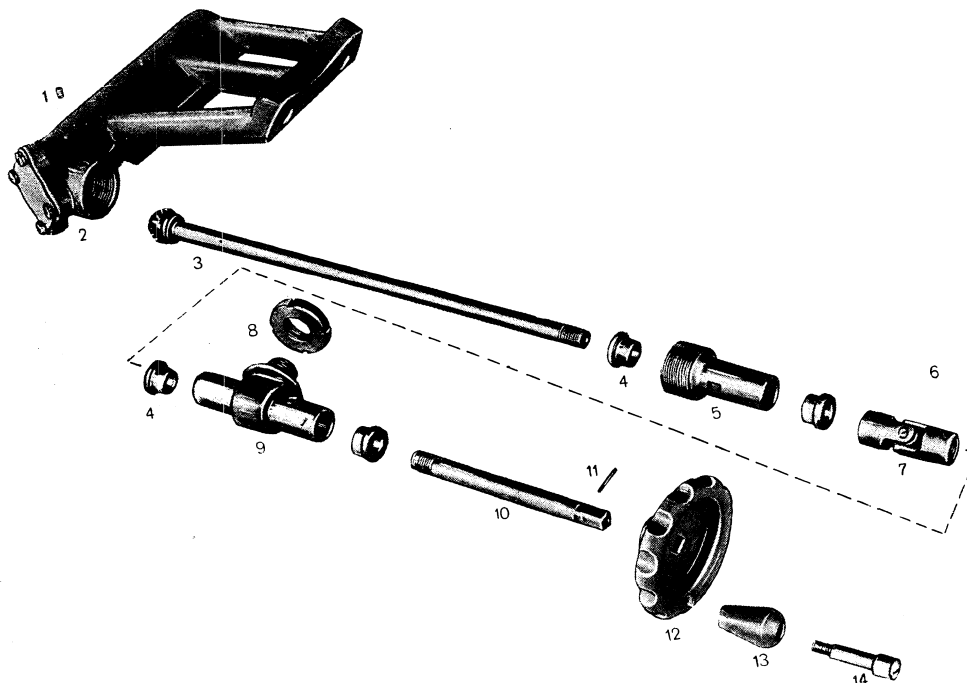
TRAVERSING MECHANISM SPINDLE AND WHEEL — DISMANTLED
